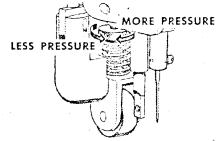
Regulating Pressure of 28120 Roller Presser on Machine 28120
